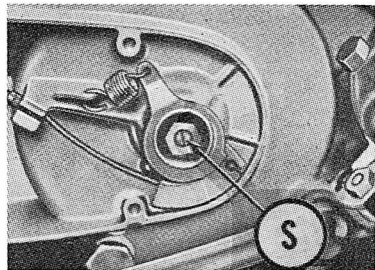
The clutch adjusting screw (S) is located under the cover on left side of engine.
